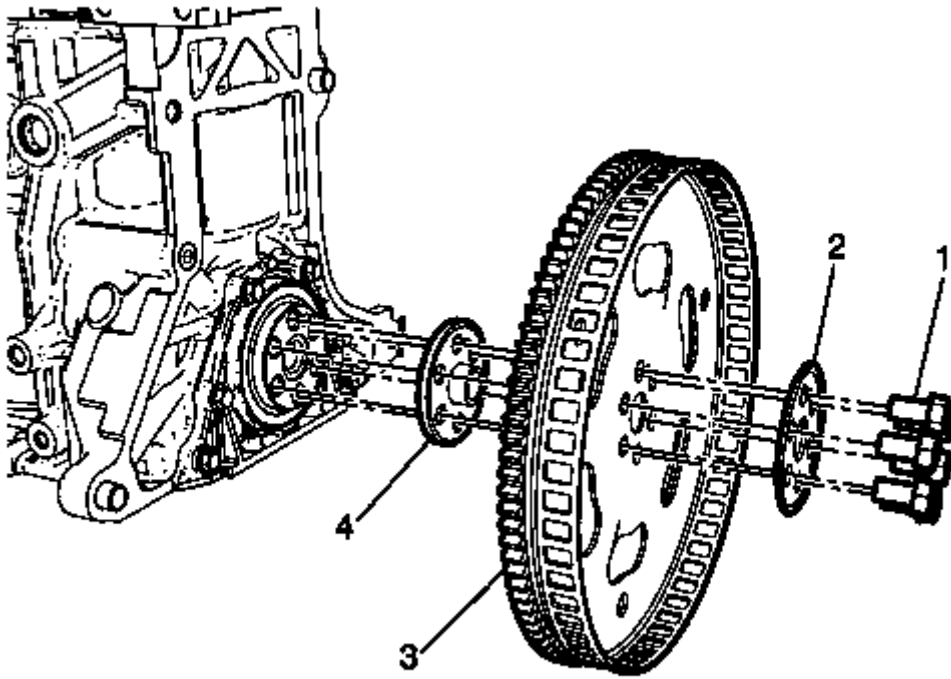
Automatic Transmission Flex Plate Bolts And Automatic Transmission Flex Plate Retainer
